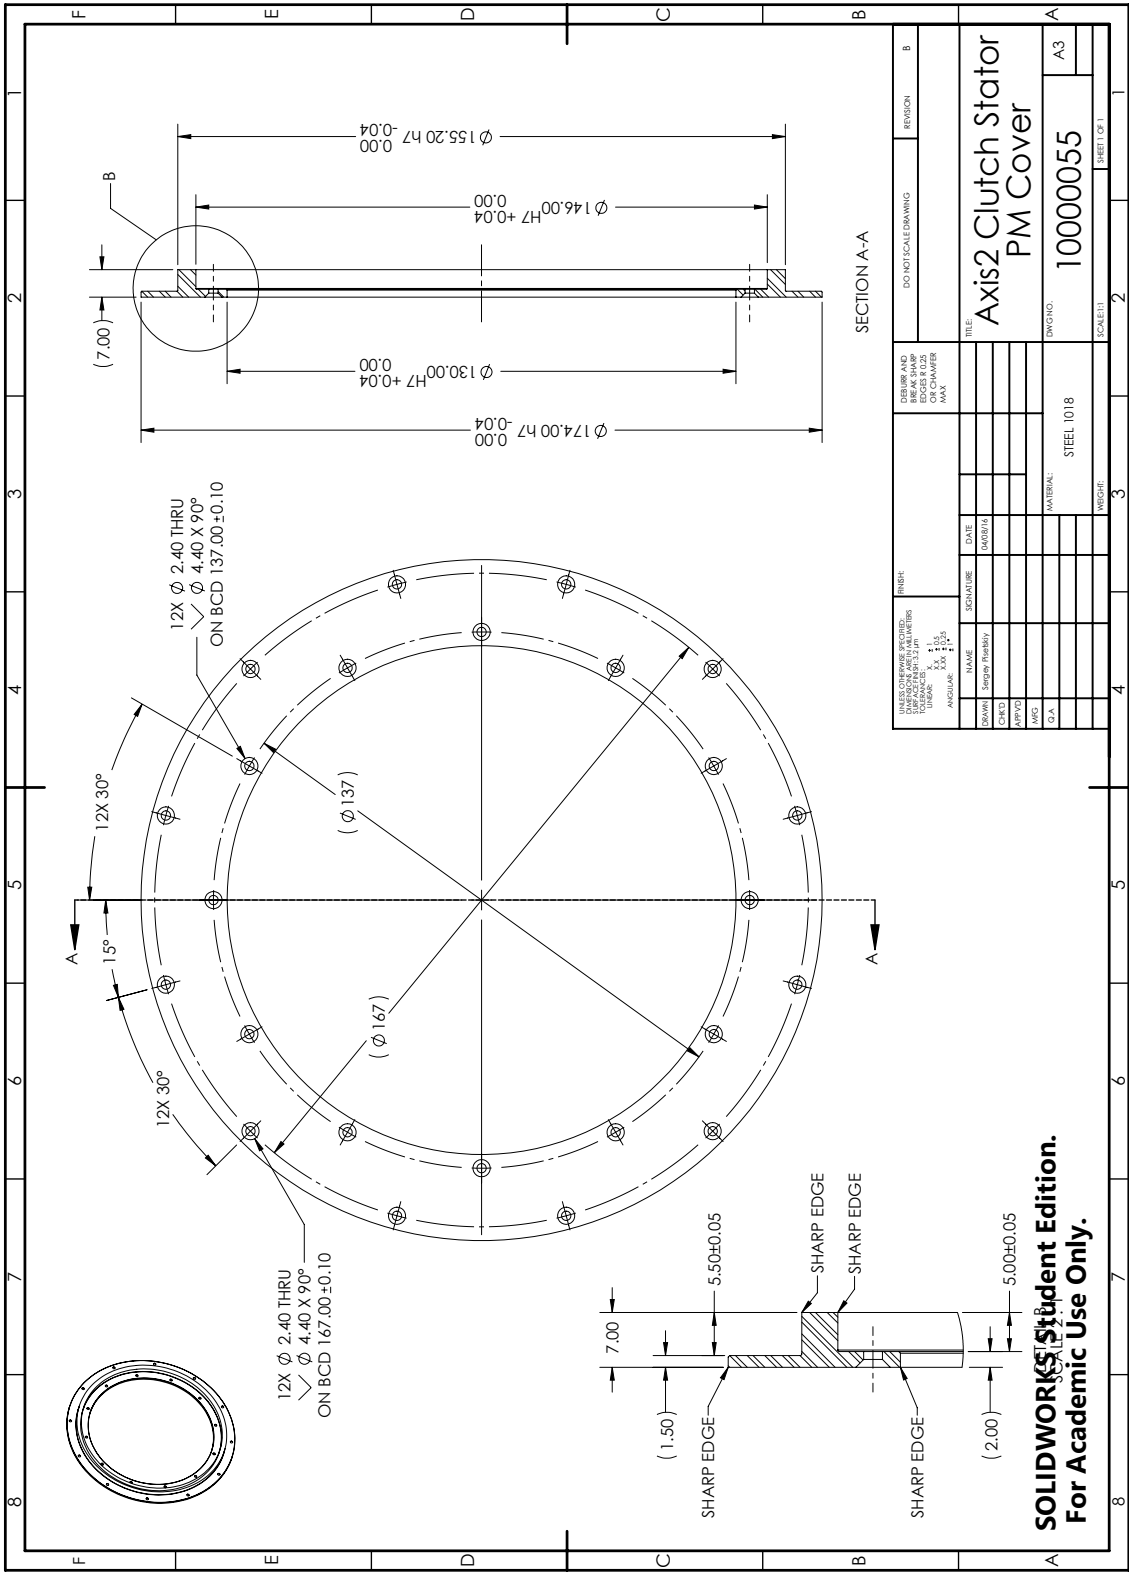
Drawing: Joint 2 clutch stator permanent magnet cover.
